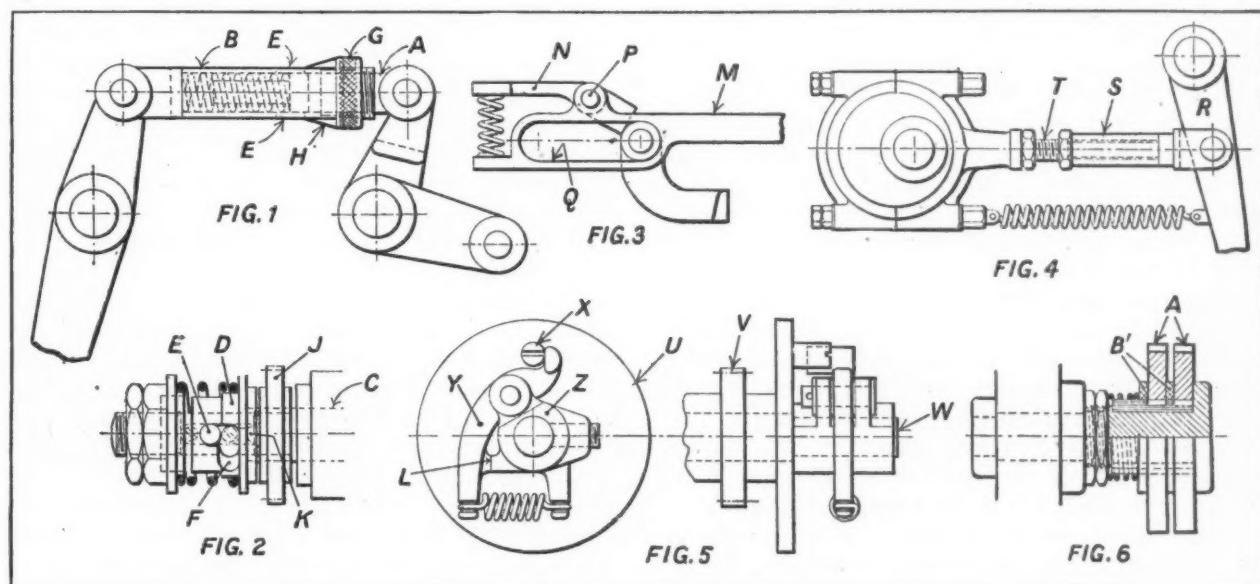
Safety Device for a Connecting-rod or Link Arm. Fig. 2. Relief Mechanism for a Driving Shaft. Fig. 3. Device to Relieve a Pusher-arm. Fig. 4. Arrangement for Relieving a Cam Rod. Fig. 5. Mechanism for Automatically Disconnecting a Main Drive. Fig. 6. A Drive Relieving Device for Small Torques
